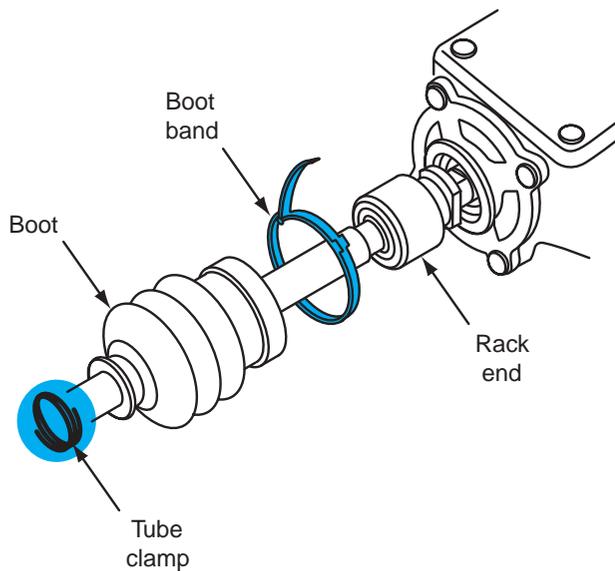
Removing boot bands and clamps from the inner tie-rod end.
